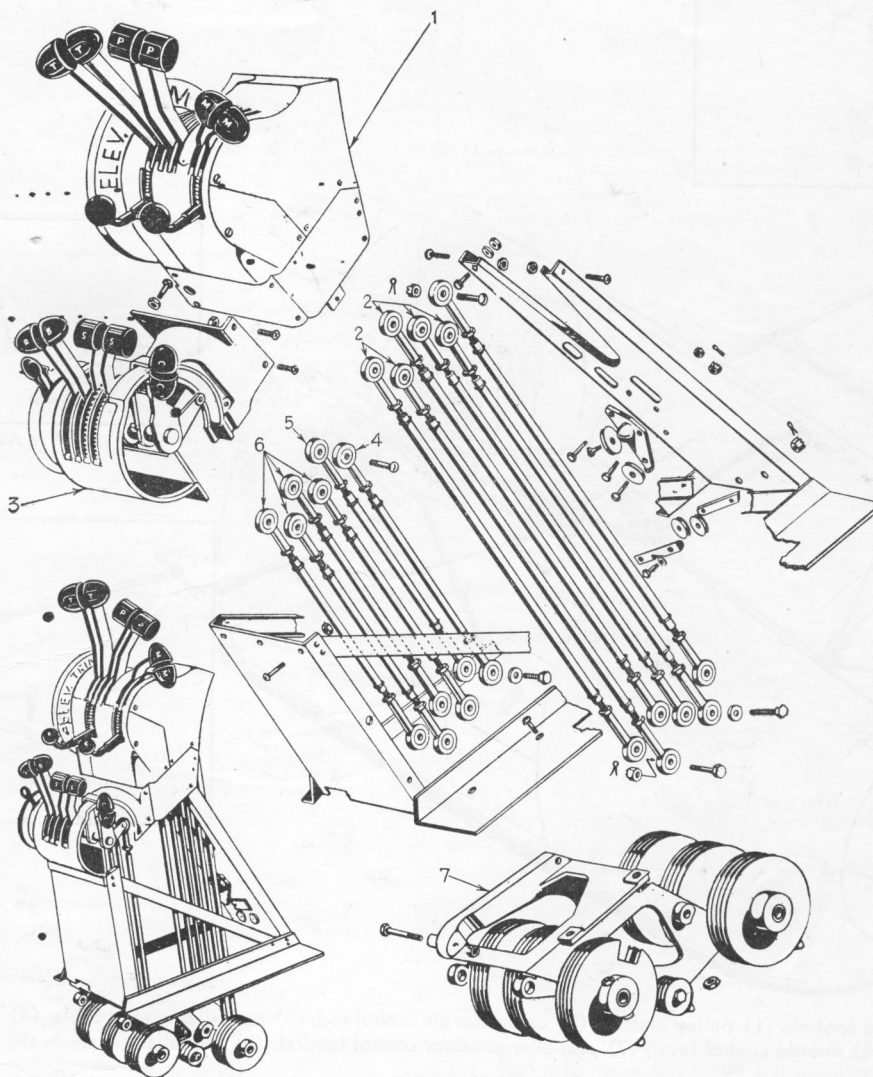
Pilot's upper control pedestal: (1) and (2) main control quadrant and rod assembly, respectively; (3) auxiliary control quadrant; (4) throttle and mixture rod; (5) and (6) right and left carburetor heat control rods, respectively; (7) control pulley base. The pedestal assembly is seen at the lower left.
